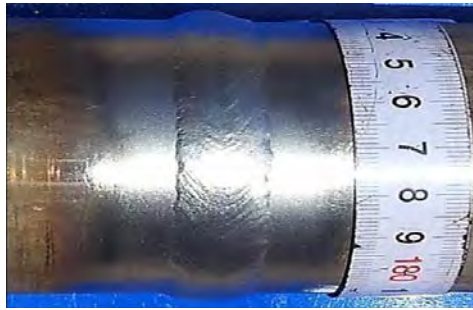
Tube to Tube Butt Weld with Hot Wire GTAW
